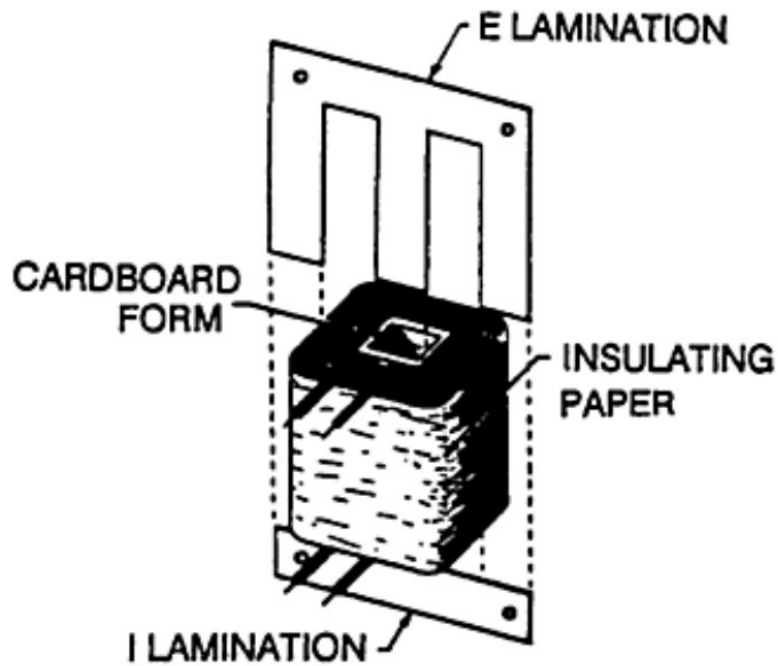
Exploded View of Shell-Type Transformer Construction.
